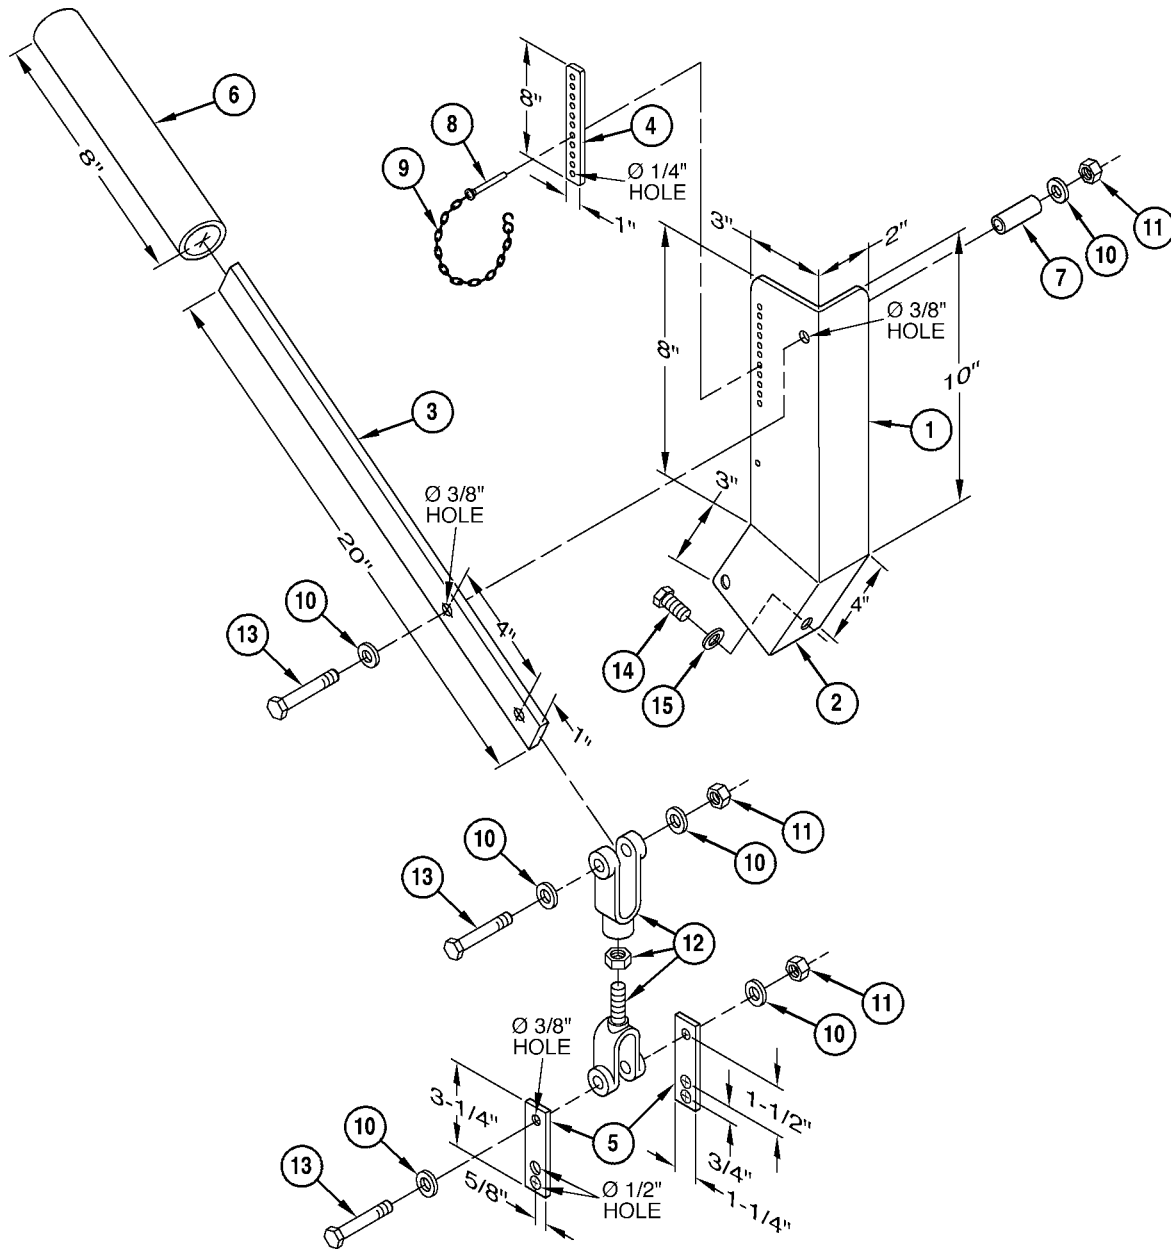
Brake Stall Test Tool (M113A3/M548A3)
